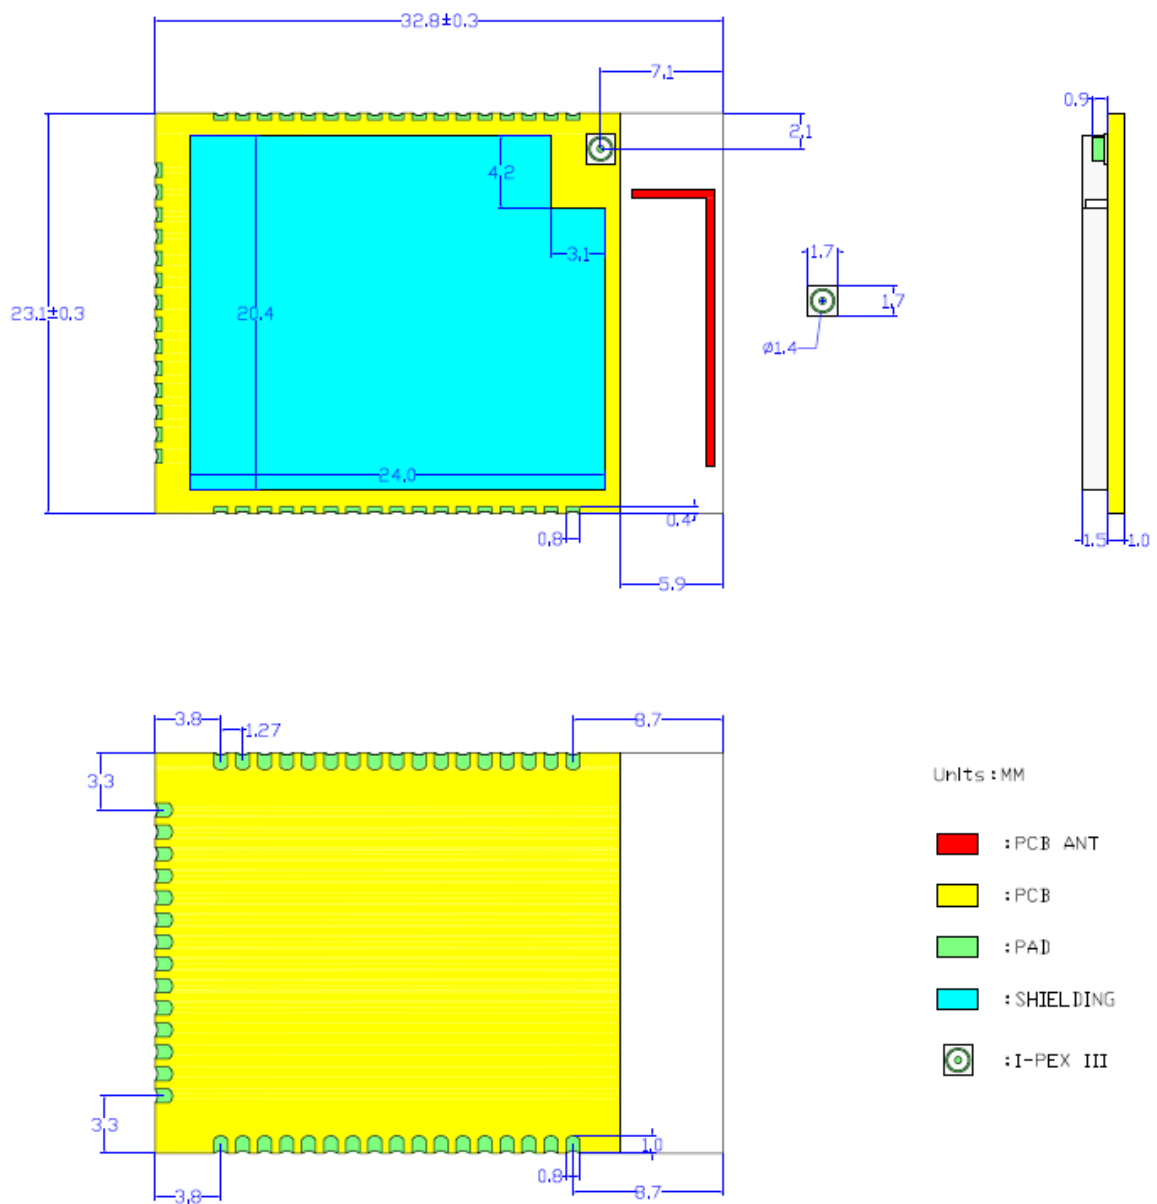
HF-LPD100-1 and -0 Mechanical Dimension
